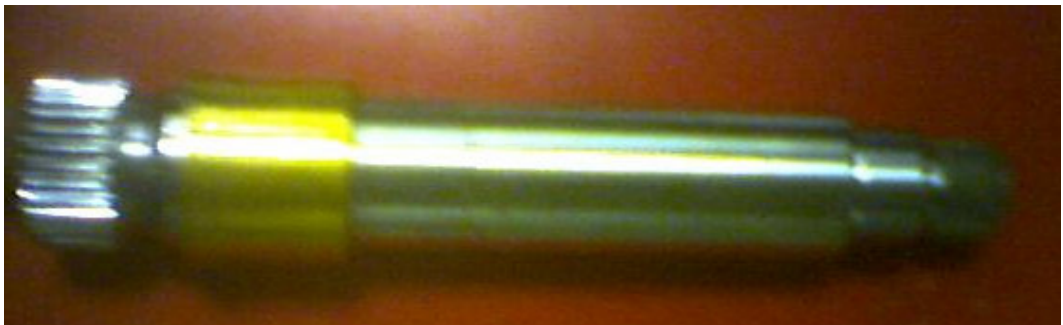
The supporting mill between the wheel and the tumble. Holds the tumble steady inside the tub while it is rotating.
